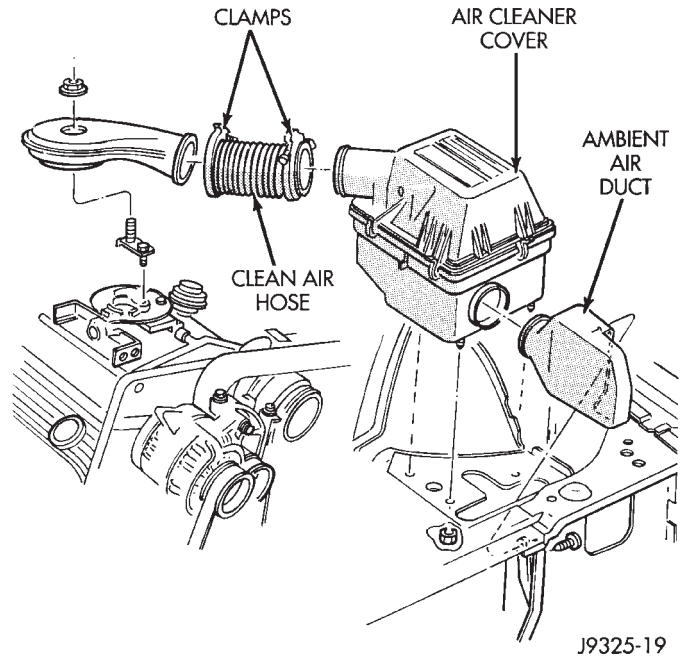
Air Cleaner—4.0L 6 Cylinder Engine
